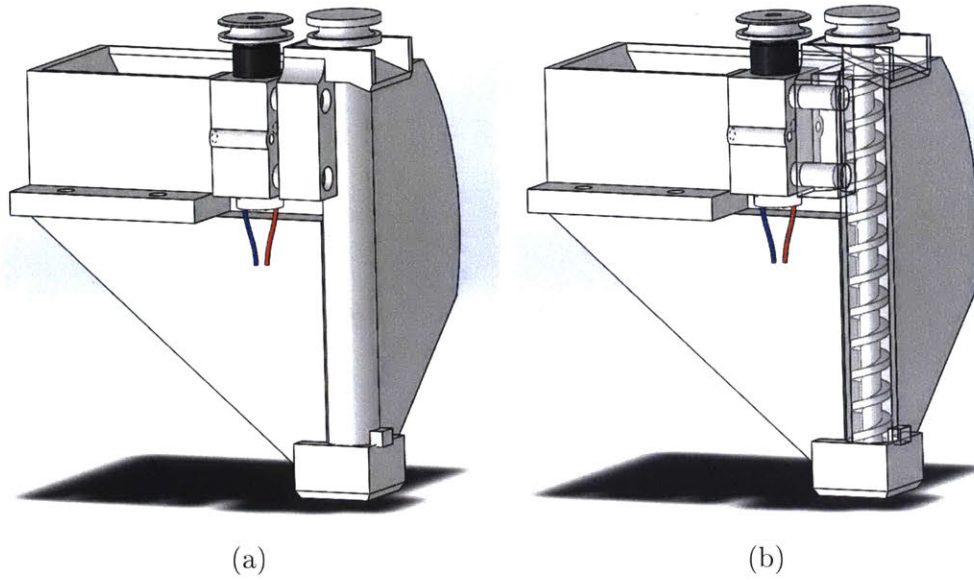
Model of the powder hopper subassembly with a wireframe view showing the details of the powder feed screw (drive o-ring not shown).
